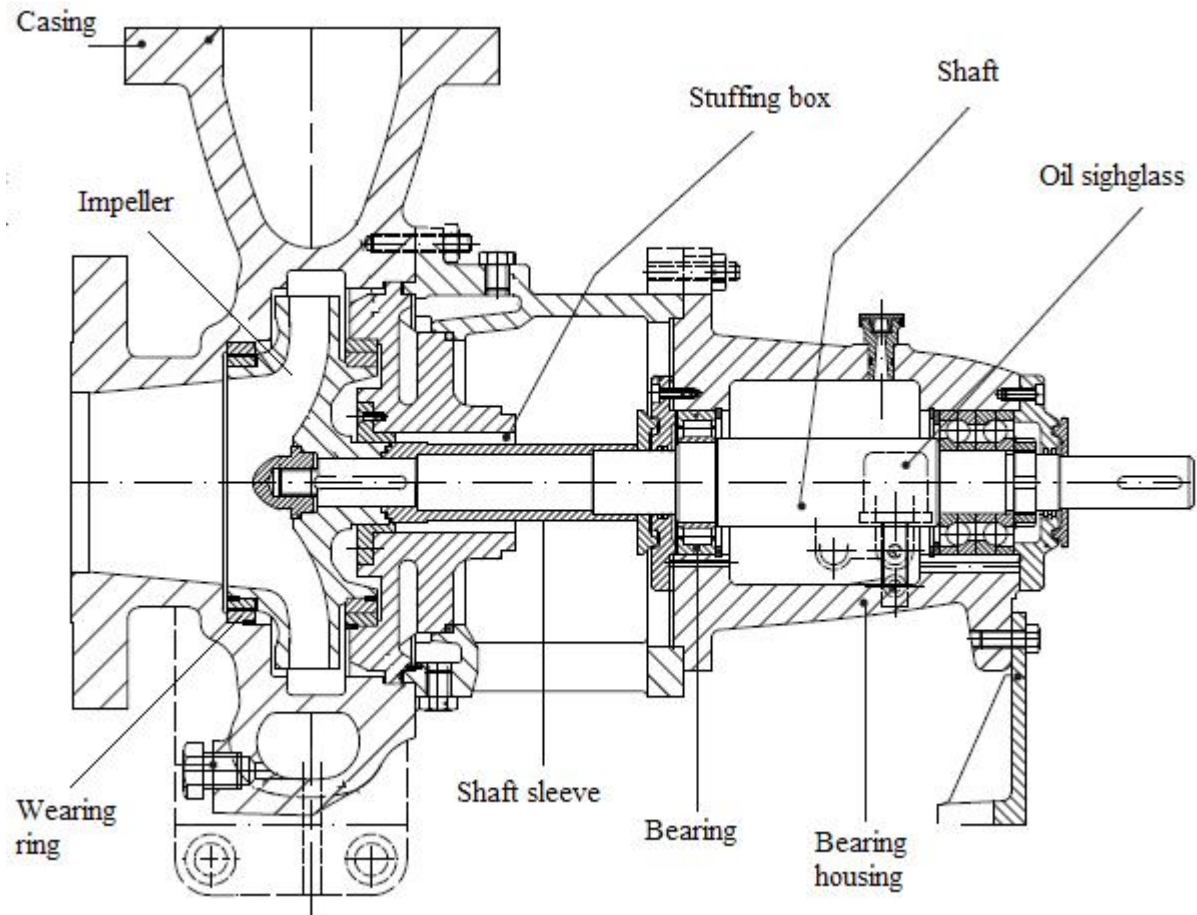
Cross sectional drawing of typical overhung single impeller centrifugal pump
